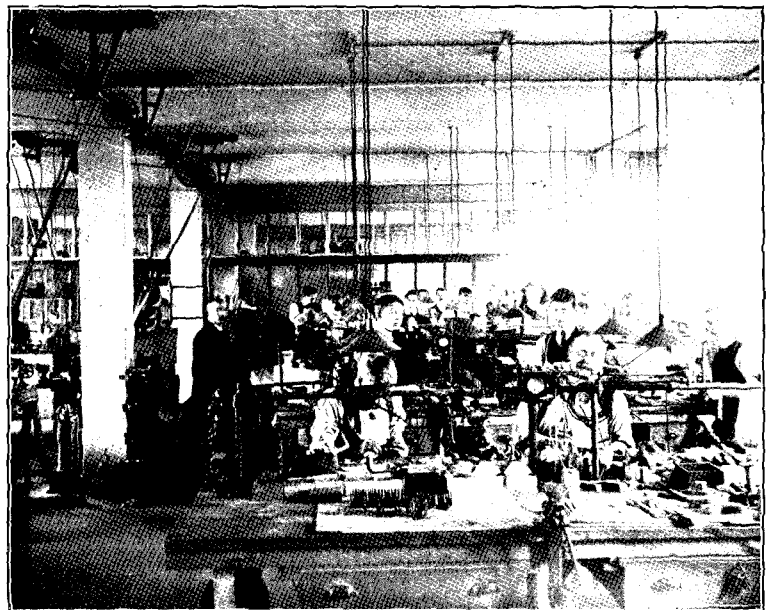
SECTION OF WORKSHOP (GROUND FLOOR).
